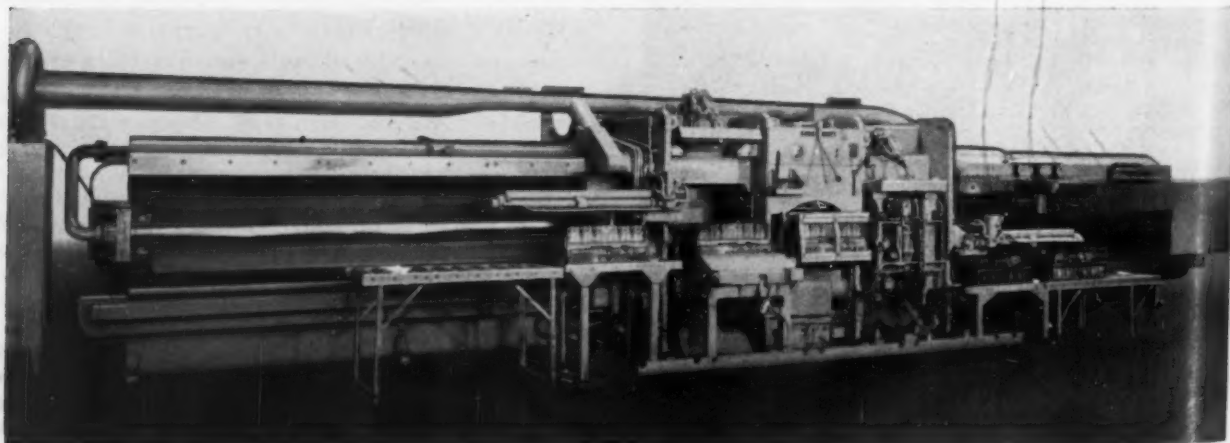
MACHINE FOR BROACHING BOTTOM, HALF BORE, TOP, AND MANIFOLD FACE ON CYLINDER BLOCK
